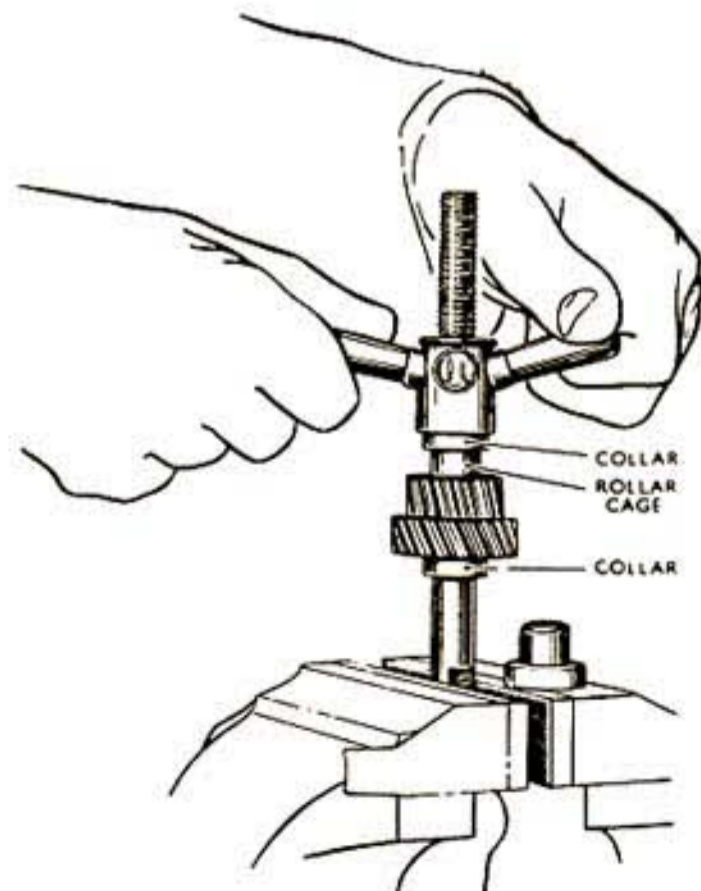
FITTING SECOND DRAWN CUP NEEDLE BEARING
